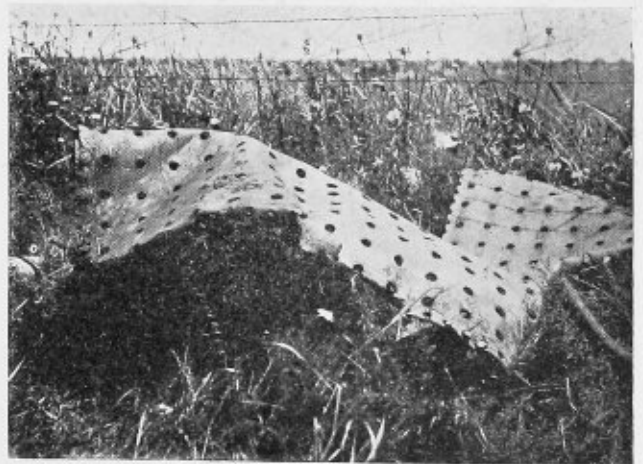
Five Rivets at Left End of Crown Sheet Held While Welded Portion Failed
